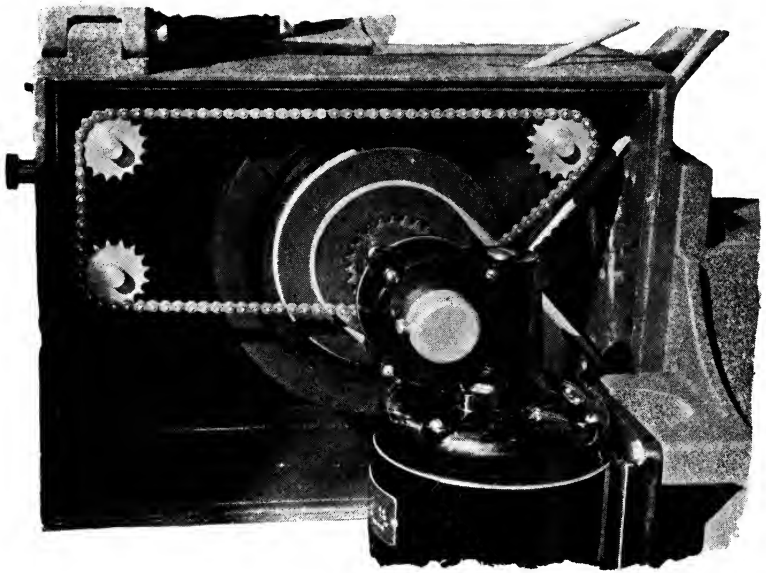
Rear view of printer, showing drive and fly-wheel.
